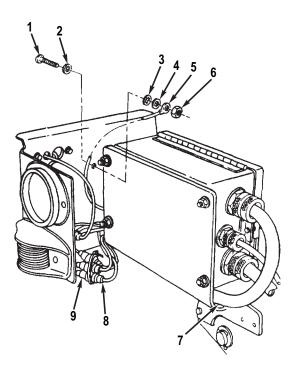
Rear Dolly Taillight Assembly Cable Assembly Retainers Installation.
